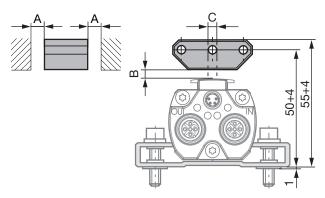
Dimensions and distances with BTL5-P-3800-2 magnet
